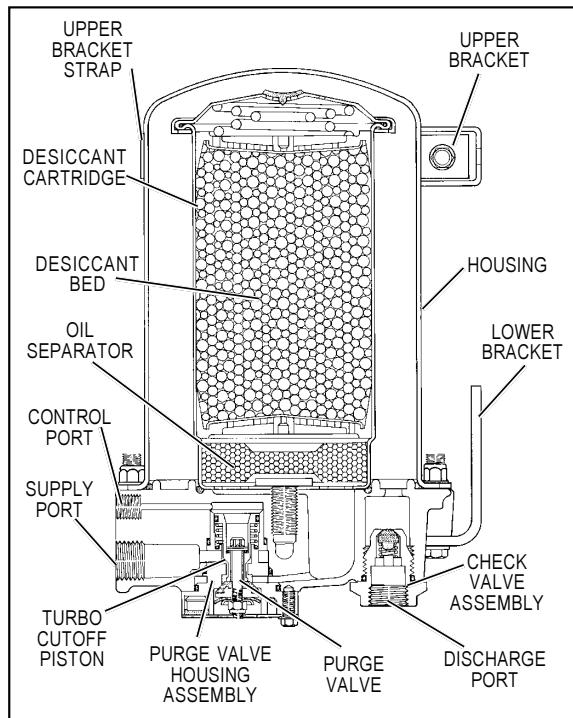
AD-9 AIR DRYER SECTIONAL VIEW
